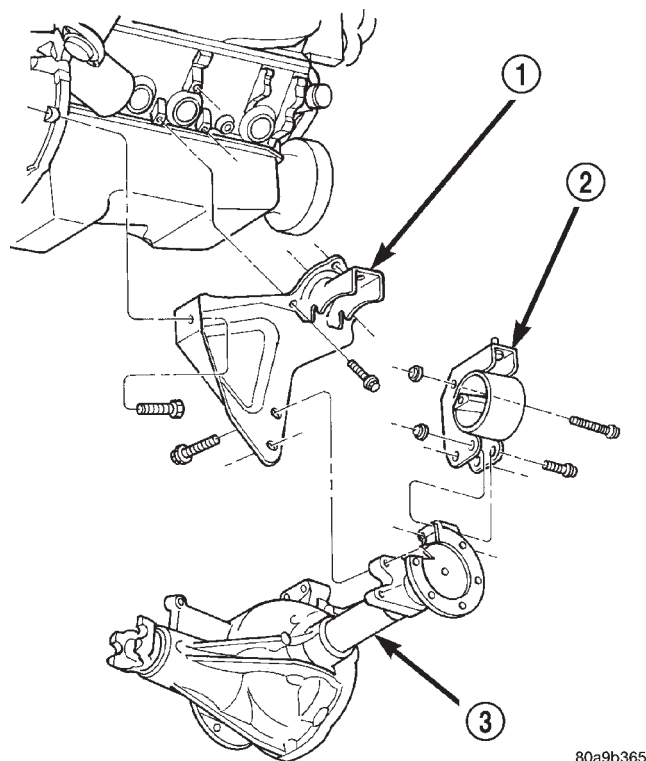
Right Engine Mount Insulator and Support Bracket—4WD Vehicles
